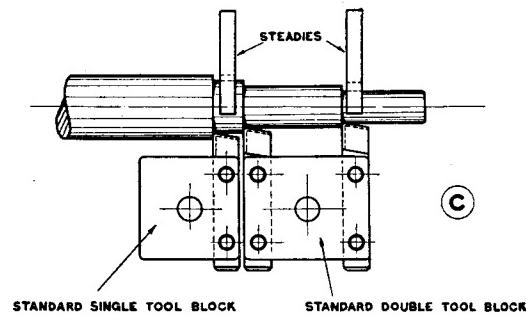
Producing stepped diameters by multiple tools, held in standard or special tool blocks in a box tool holder.
